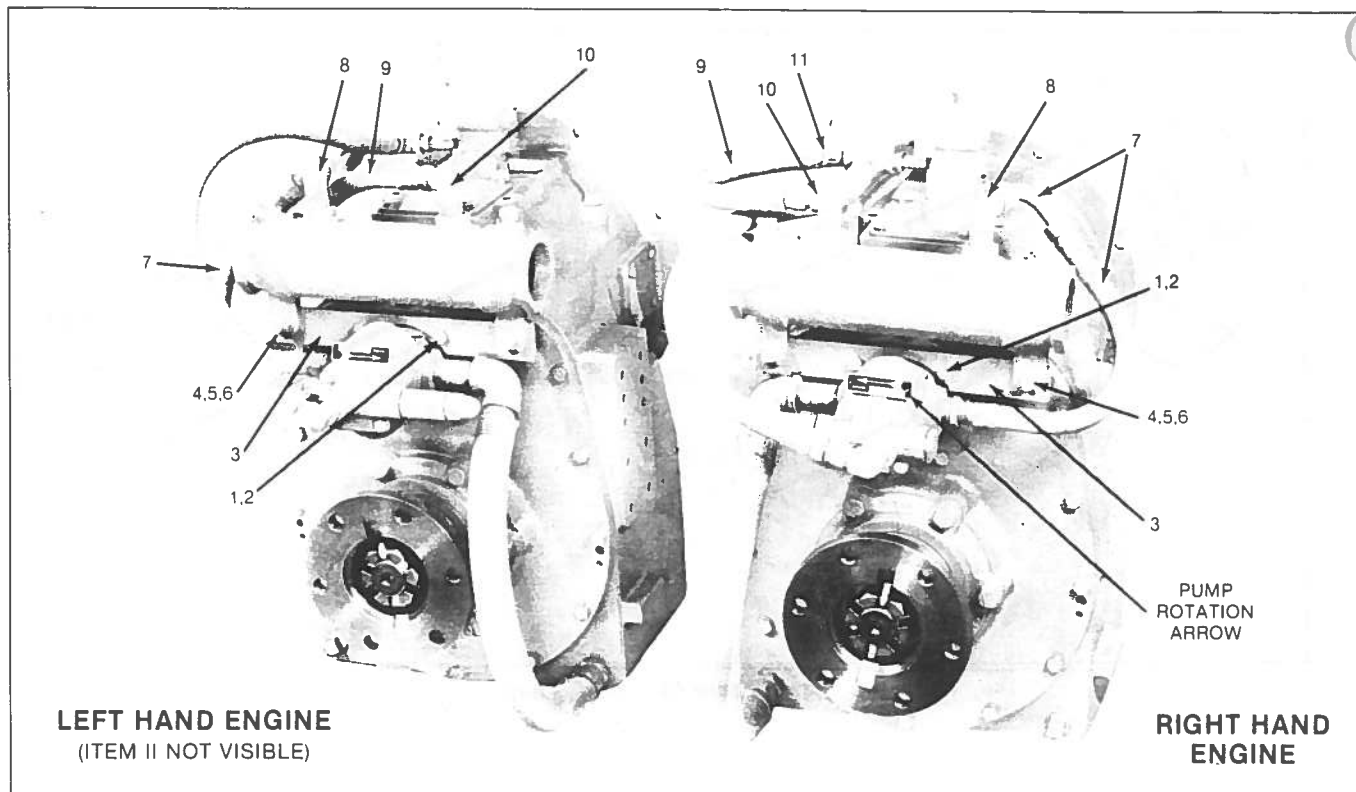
Hose and Bracket Kit No. 1-13908-0000 to be used with Cooler No. 12445-2100
